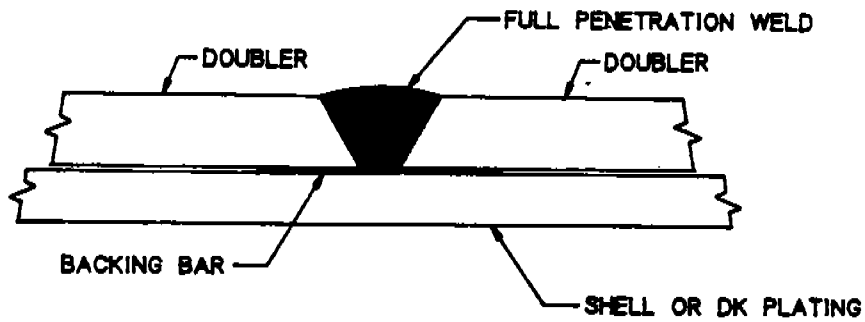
DOUBLER BUTT JOINT WITH BACKING BAR
